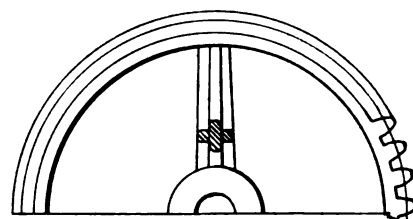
CONVENTIONAL METHOD OF DRAWING GEAR WHEELS.
